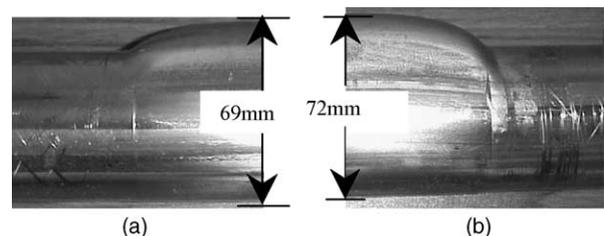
Protrusion height for tube specimens after test: (a) non-lubricated; (b) lubricated.
